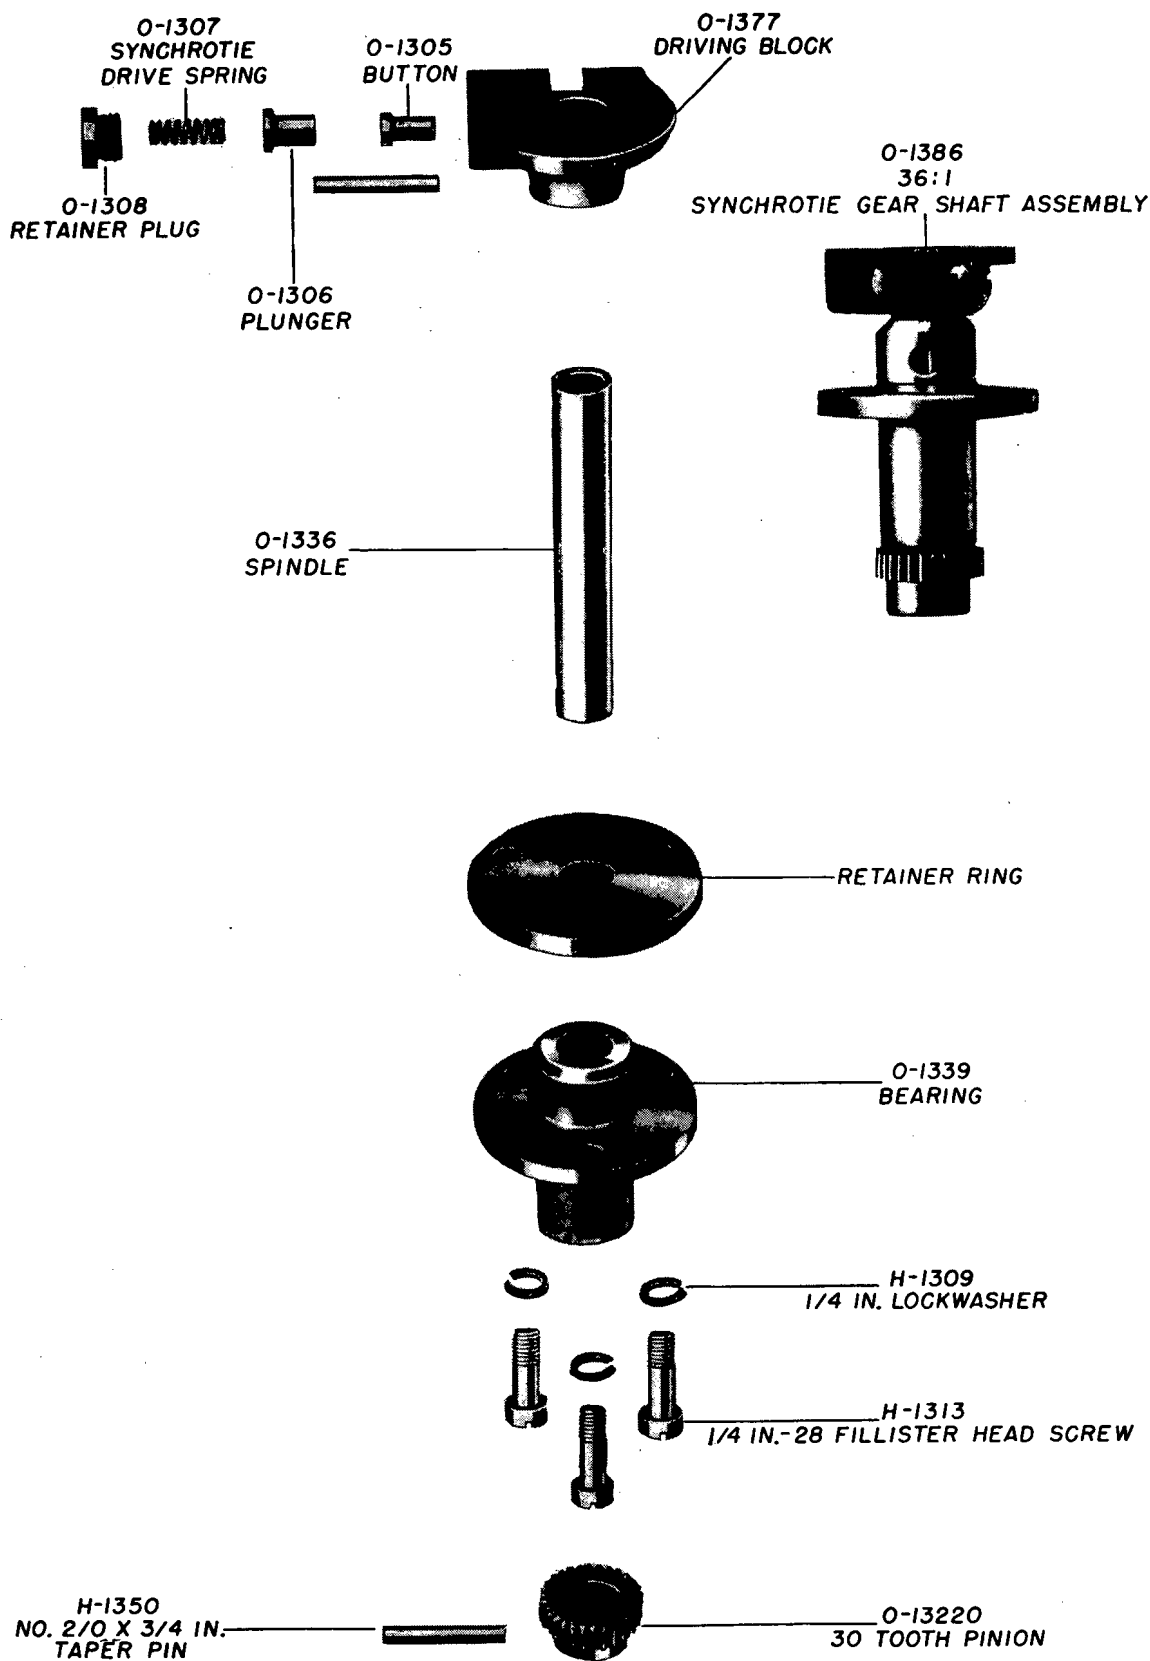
36-to-1 Synchrotie Gear Shaft Assembly O-1386
